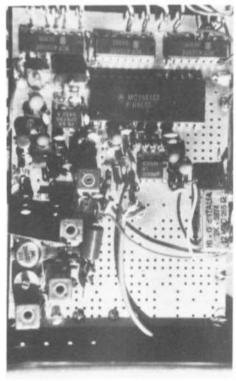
Completed DL 5 NP 001 printed circuit board ready for installation in the TELECAR TS 160
